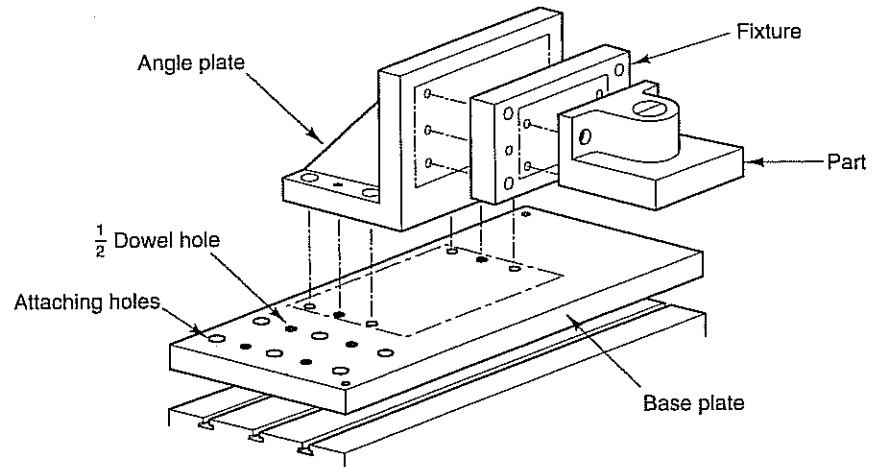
Assembly of standard fixtures (Gouldson, 1982).
